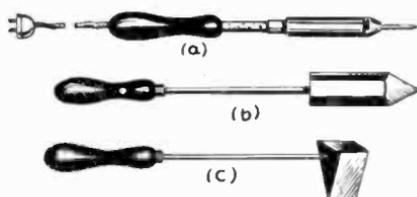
Several types of soldering irons: a—Electric; b and c—externally heated.
